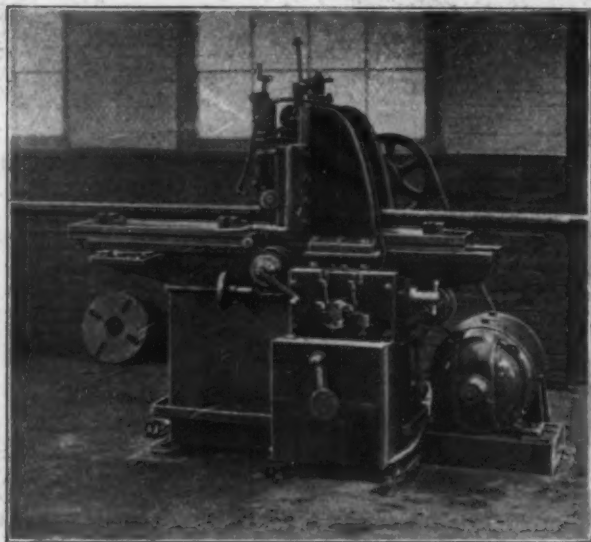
A Key Seat Milling Machine, Motor Driven.
